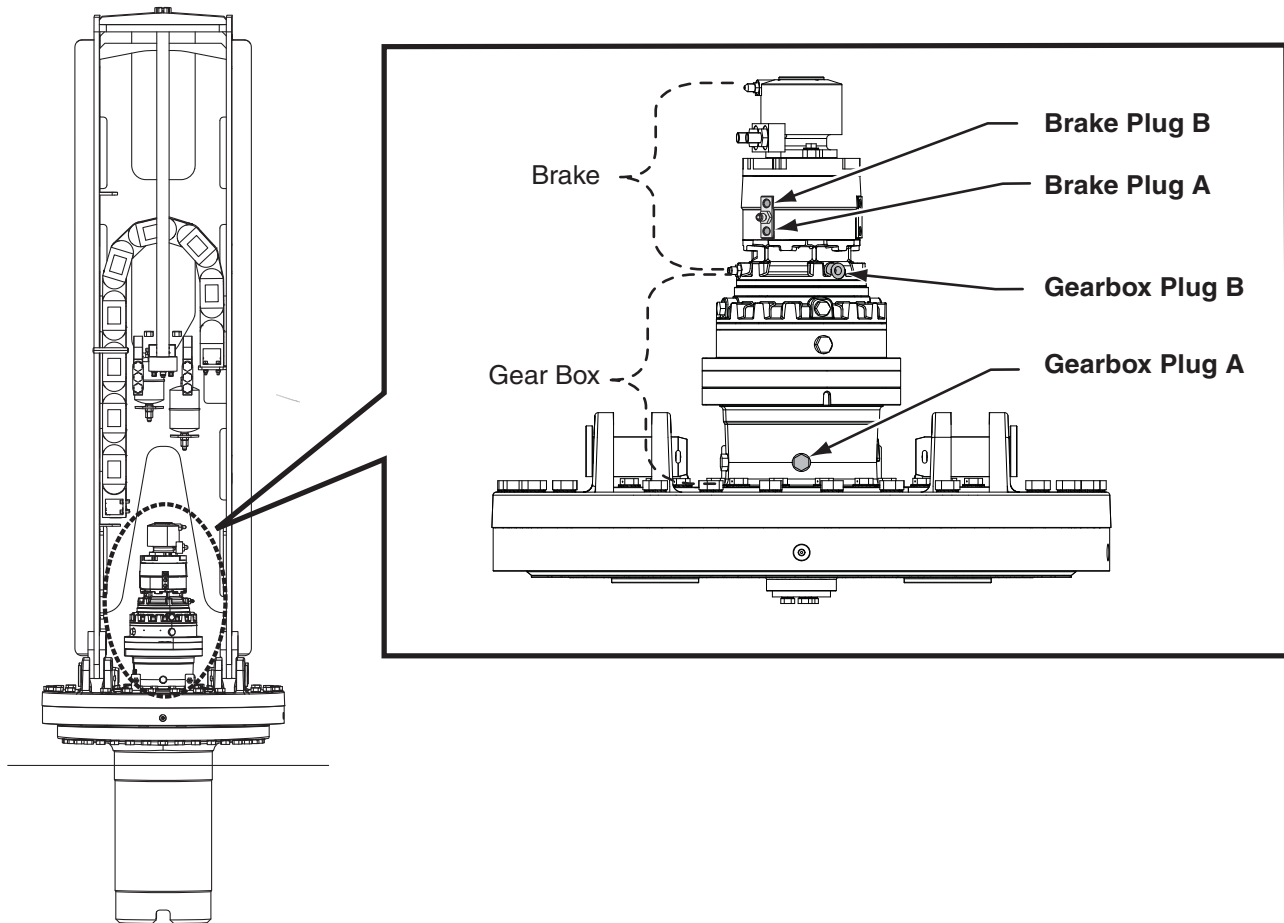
Changing Brake and Gearbox Reservoir Oil
